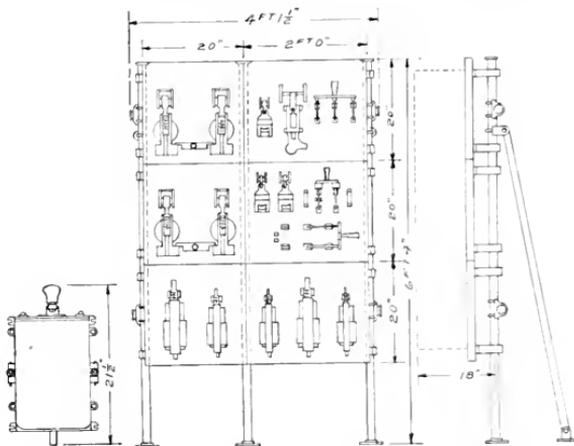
Outline of Contactor Panel and Controller for Rubber Calender Drive
